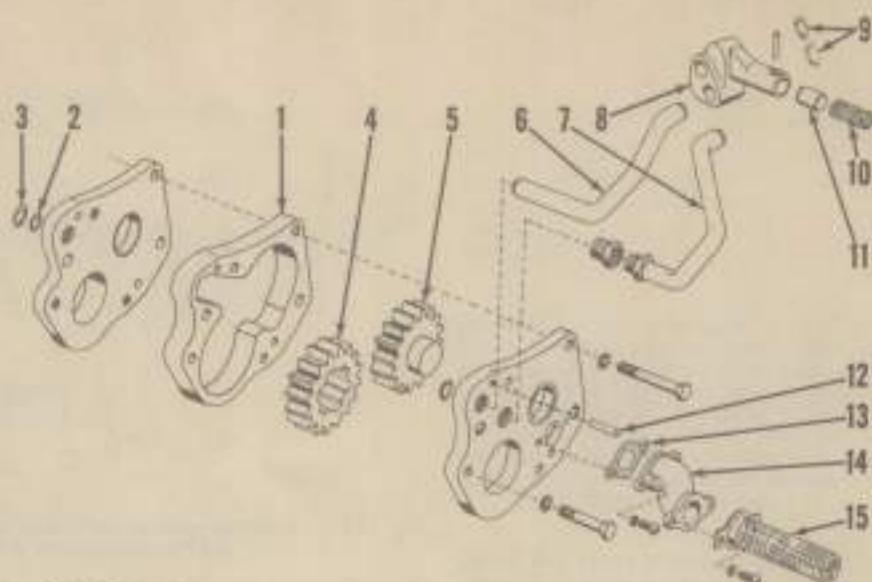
Exploded view of late production D-17 "Power-Director" oil pump. Early type is similar.
